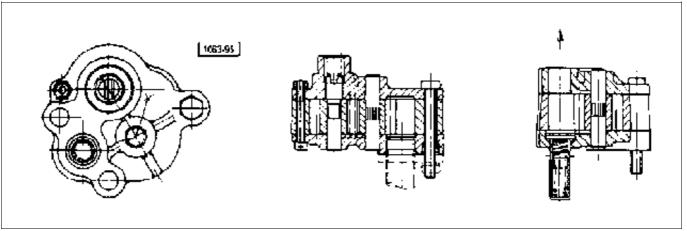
Oil pump assembly cross-section - SILVER 80 - 90 - 100.4.
